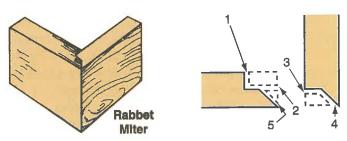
Making a rabbet miter. (*Delta International Machinery Corp.*)
